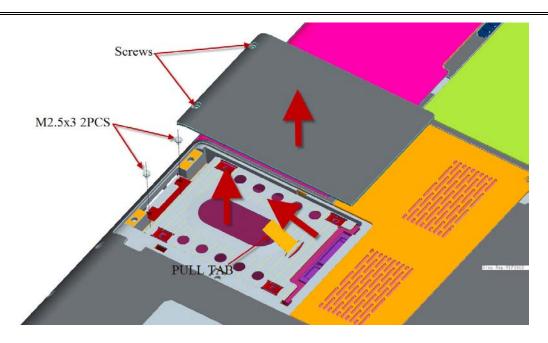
Remove the SSD/MAIN HDD assembly
